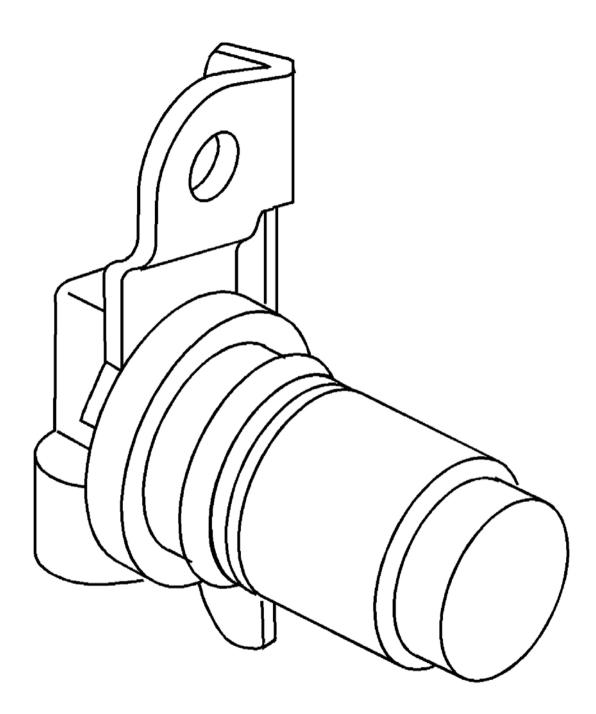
Vehicle Speed Sensor Courtesy of GENERAL MOTORS CORP.
